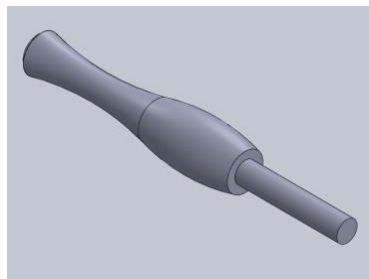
Main Body Scalpel Handle with 40mm Grip Core
